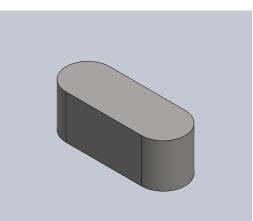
This is the key used for the input shaft. The key size depends on the shaft diameter so the intermediate shaft keys are slightly bigger.
